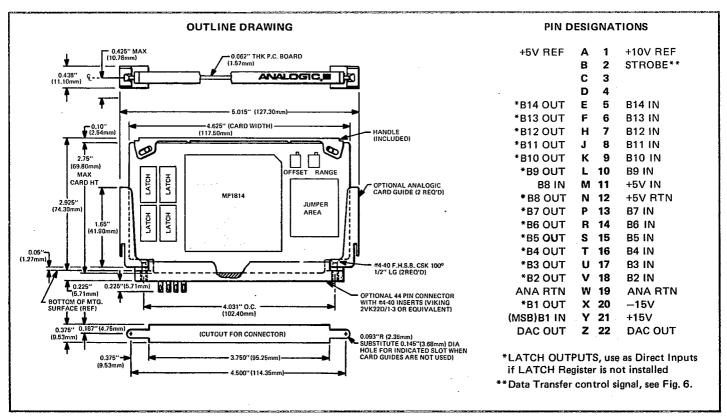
AN1814 Outline Drawing, Mounting Dimensions and PC-Board Edge Connector.
